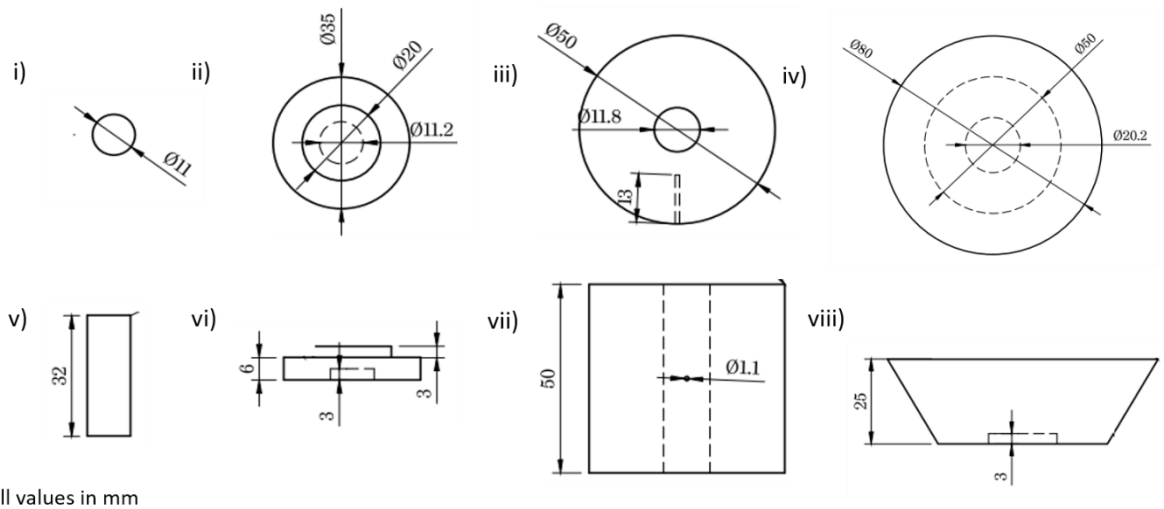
Drawing of 11 mm graphite mould specifications i) ii) iii) and iv) top view of punch, spacer, die and support v), vi) vii) and viii) side view of punch, spacer die and support [9].
